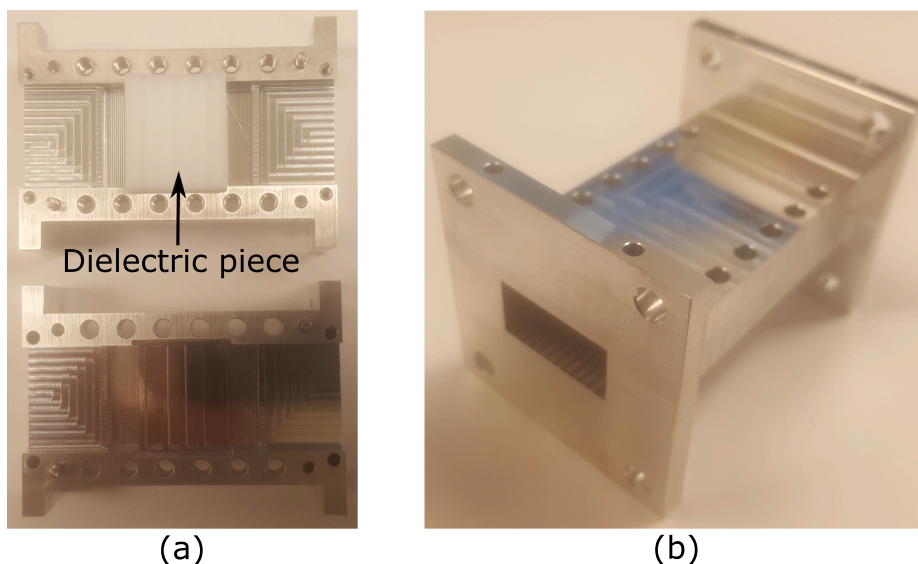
Photographs of the manufactured prototype. (a) Filter before the assembly, presenting details of the aluminum housing. The picture shows how the dielectric piece is easily aligned in the filter housing. (b) View of the assembled filter.
